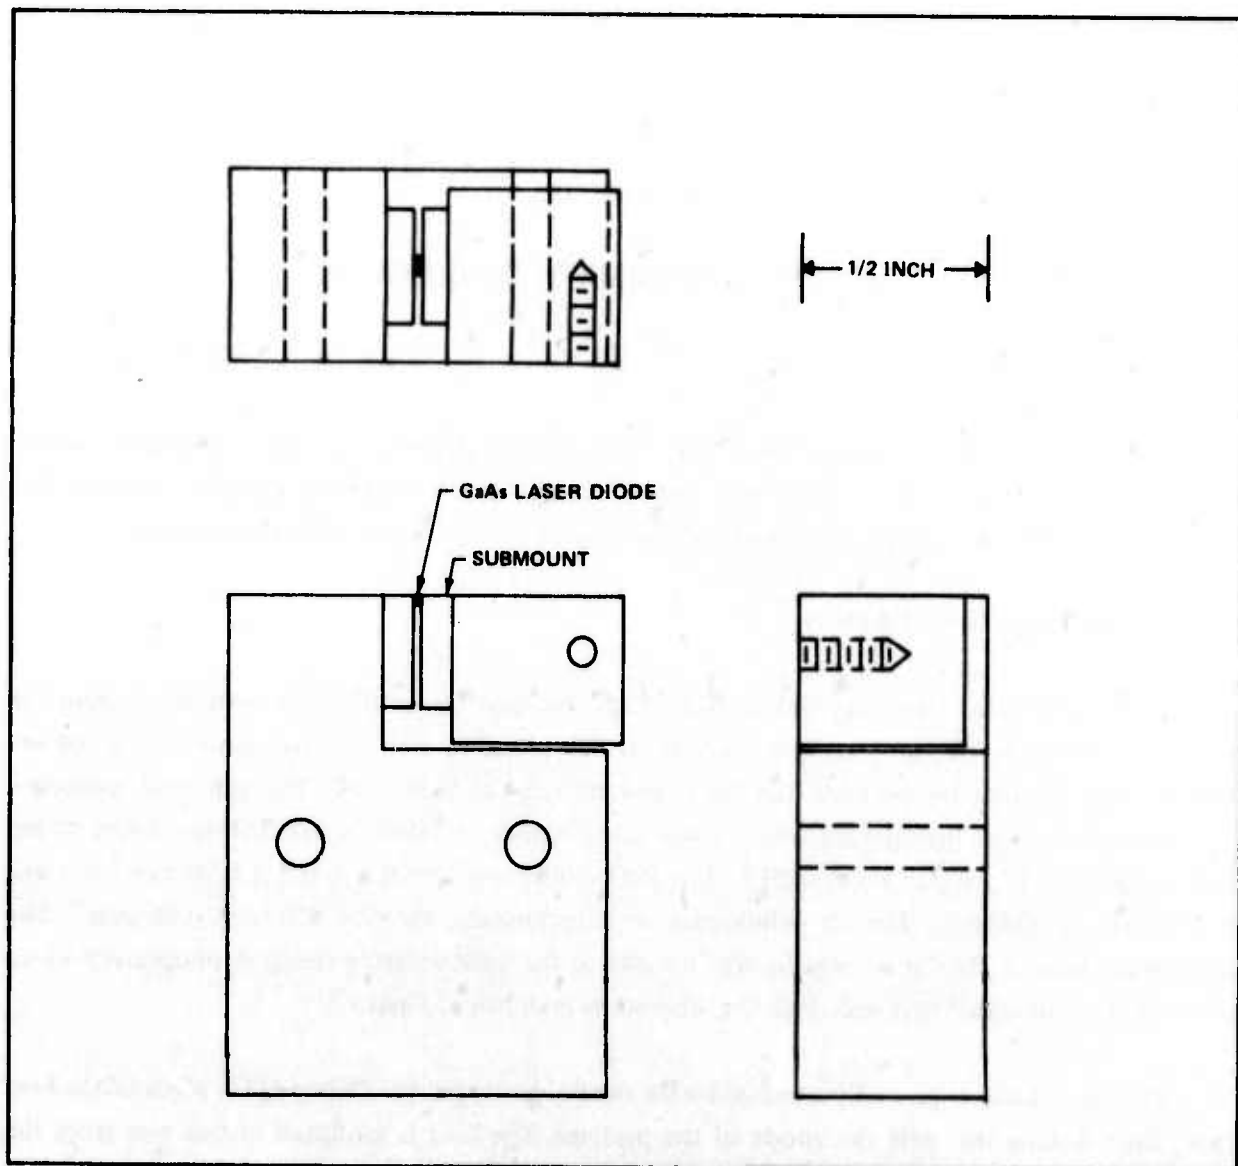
Final Double-Sided Laser Heat Sink Design (Type II)
